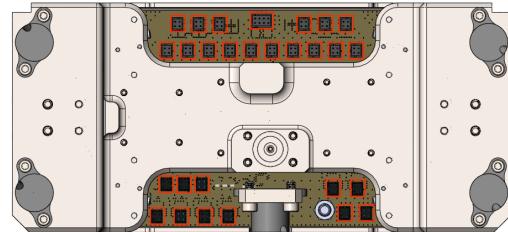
Placement of Connectors (Red) Utilizing Gaps in Manifold
